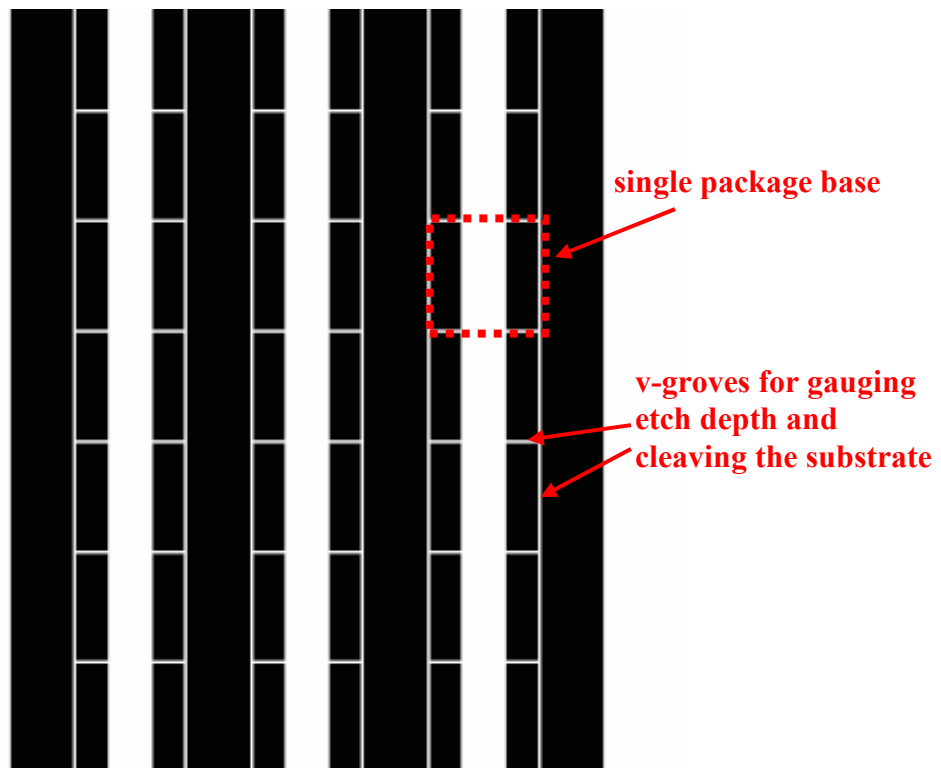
A drawing of the mask used to define the etched channels and package outlines.
